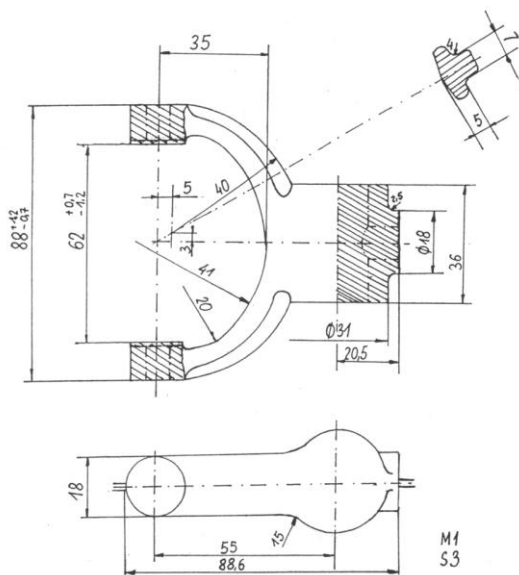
presents the technical drawing of the fork locking mechanism. The basic production technique of this element was hot forging.
